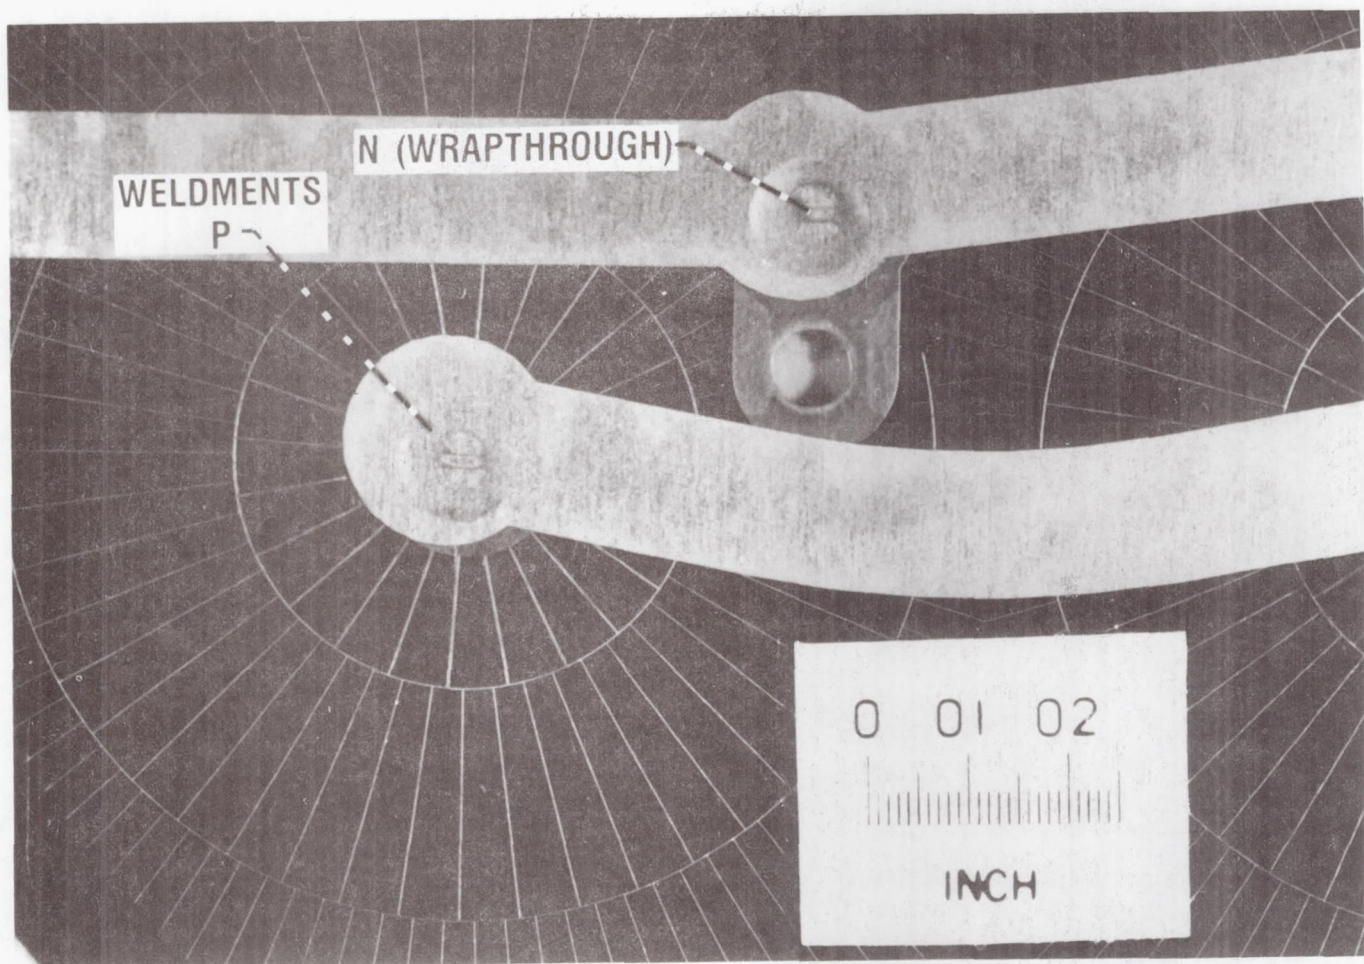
Close-up view of copper interconnect weld contact points, shown is one P-weld and one N-weld contact.
